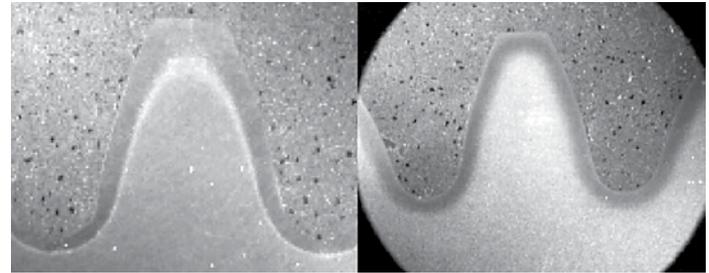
Comparison of an induction hardened gear tooth and a carburized gear tooth: Left is induction-hardened tooth; Right is carburized tooth [1] 5X.
